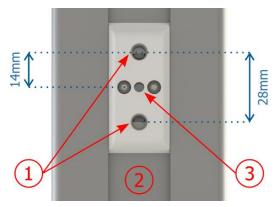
Fastening Mechanism Specifications: 1) Thread for ¼" screws; 2) Track for changing the fastening point; 3) Ø4mm hole for guide pin
